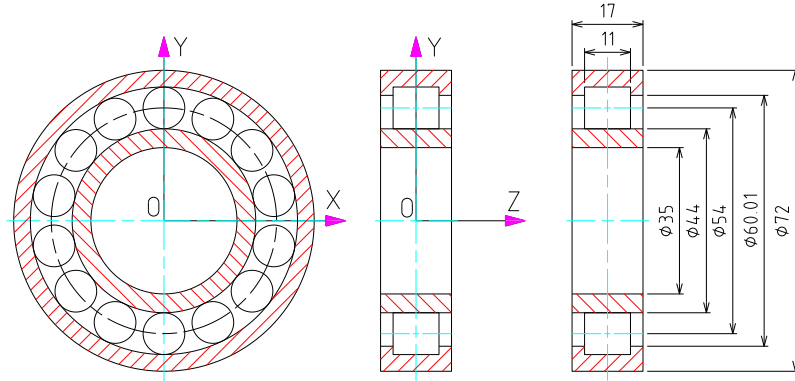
Structure of the roller bearing (NU207E, NTN)
